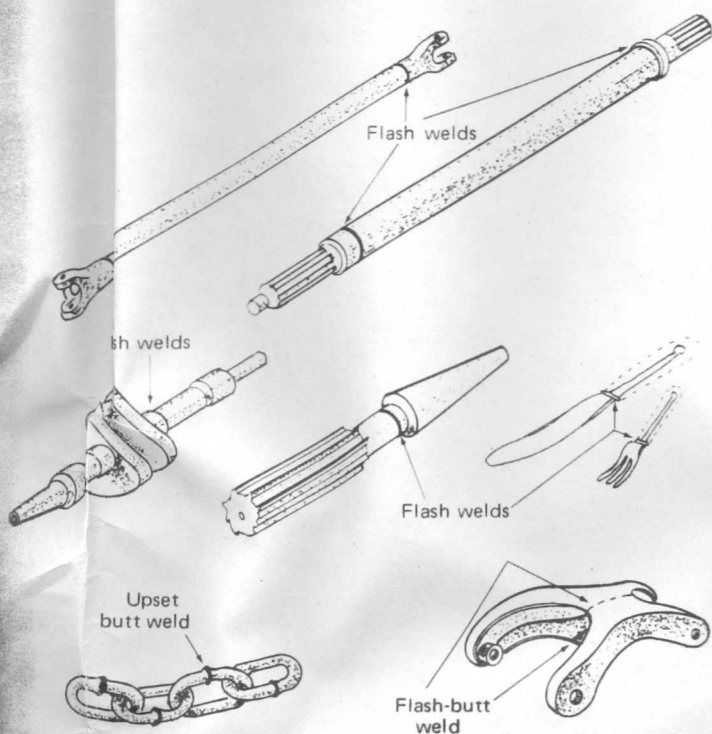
Examples of flash butt-welding applications. (Redrawn from *Resistance Welding, Designing, Tooling and Applications* by W. A. Stanley. Copyright 1950 McGraw-Hill Book Company. Used with permission of McGraw-Hill Book Company.)
